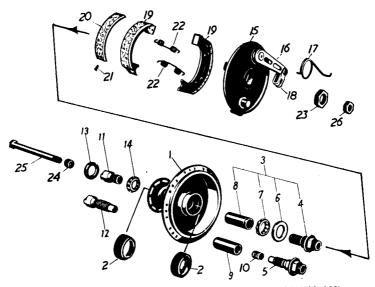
Front Hub Assembly (Up to Model 482 754/522 989)
